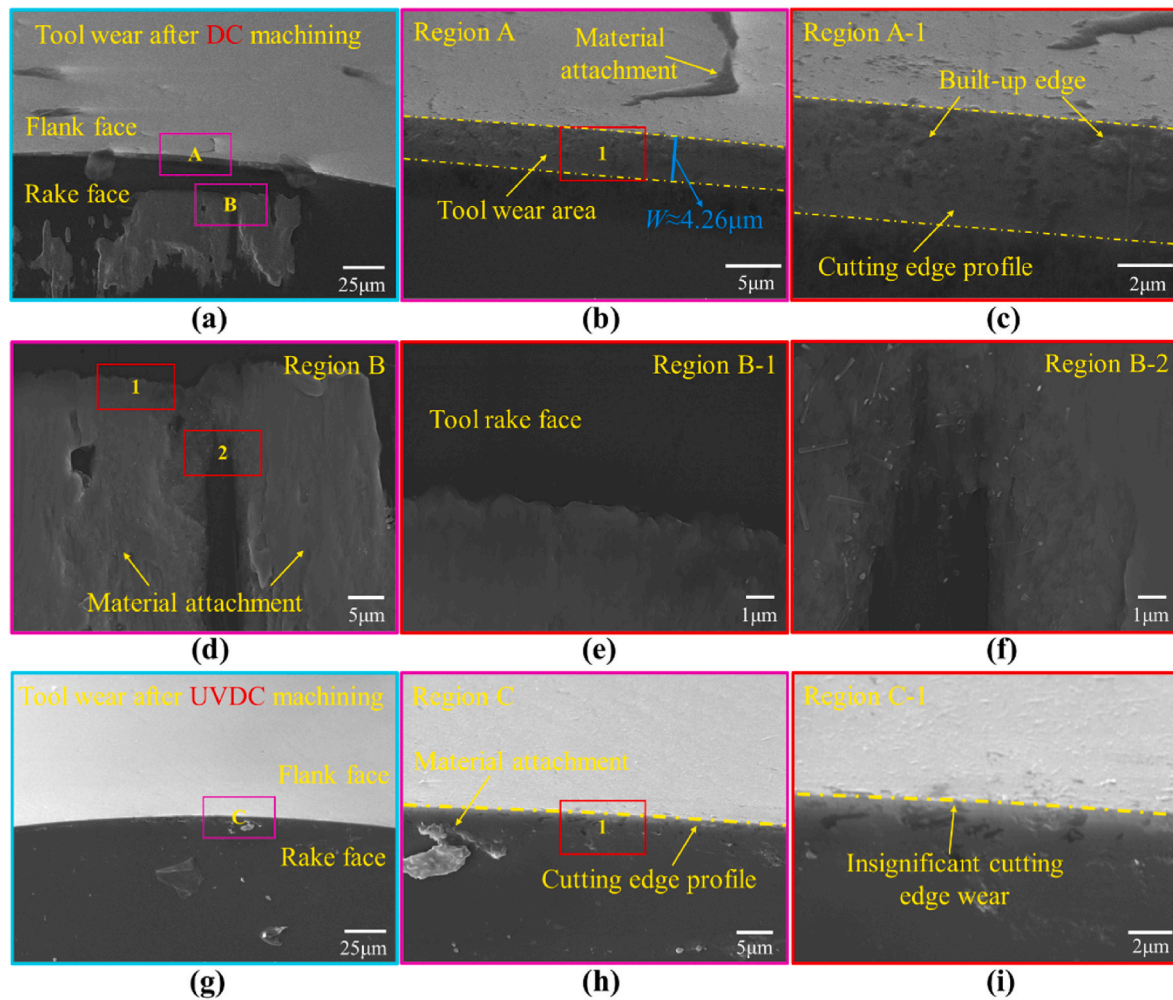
The diamond tool wear after DC and UVDC machining respectively. (a)–(f) tool wear morphology after DC machining; (g)–(i) tool wear morphology after UVDC machining.
